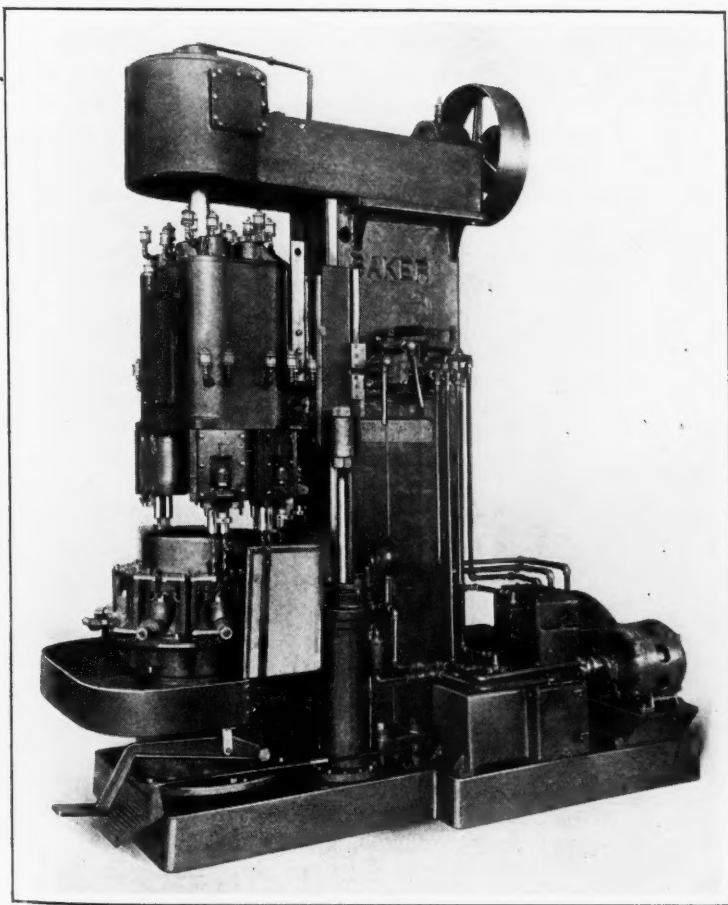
Baker "Twin Pull" Drilling and Boring Machine with Oilgear Feed
